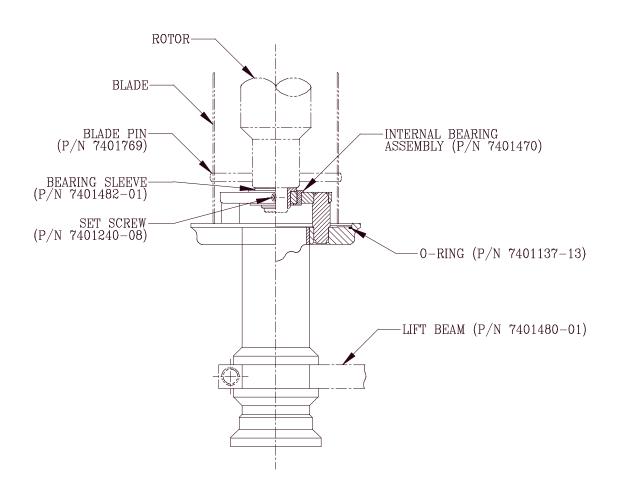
Three-Inch Diameter (76.2 mm) In-Line Product Head
